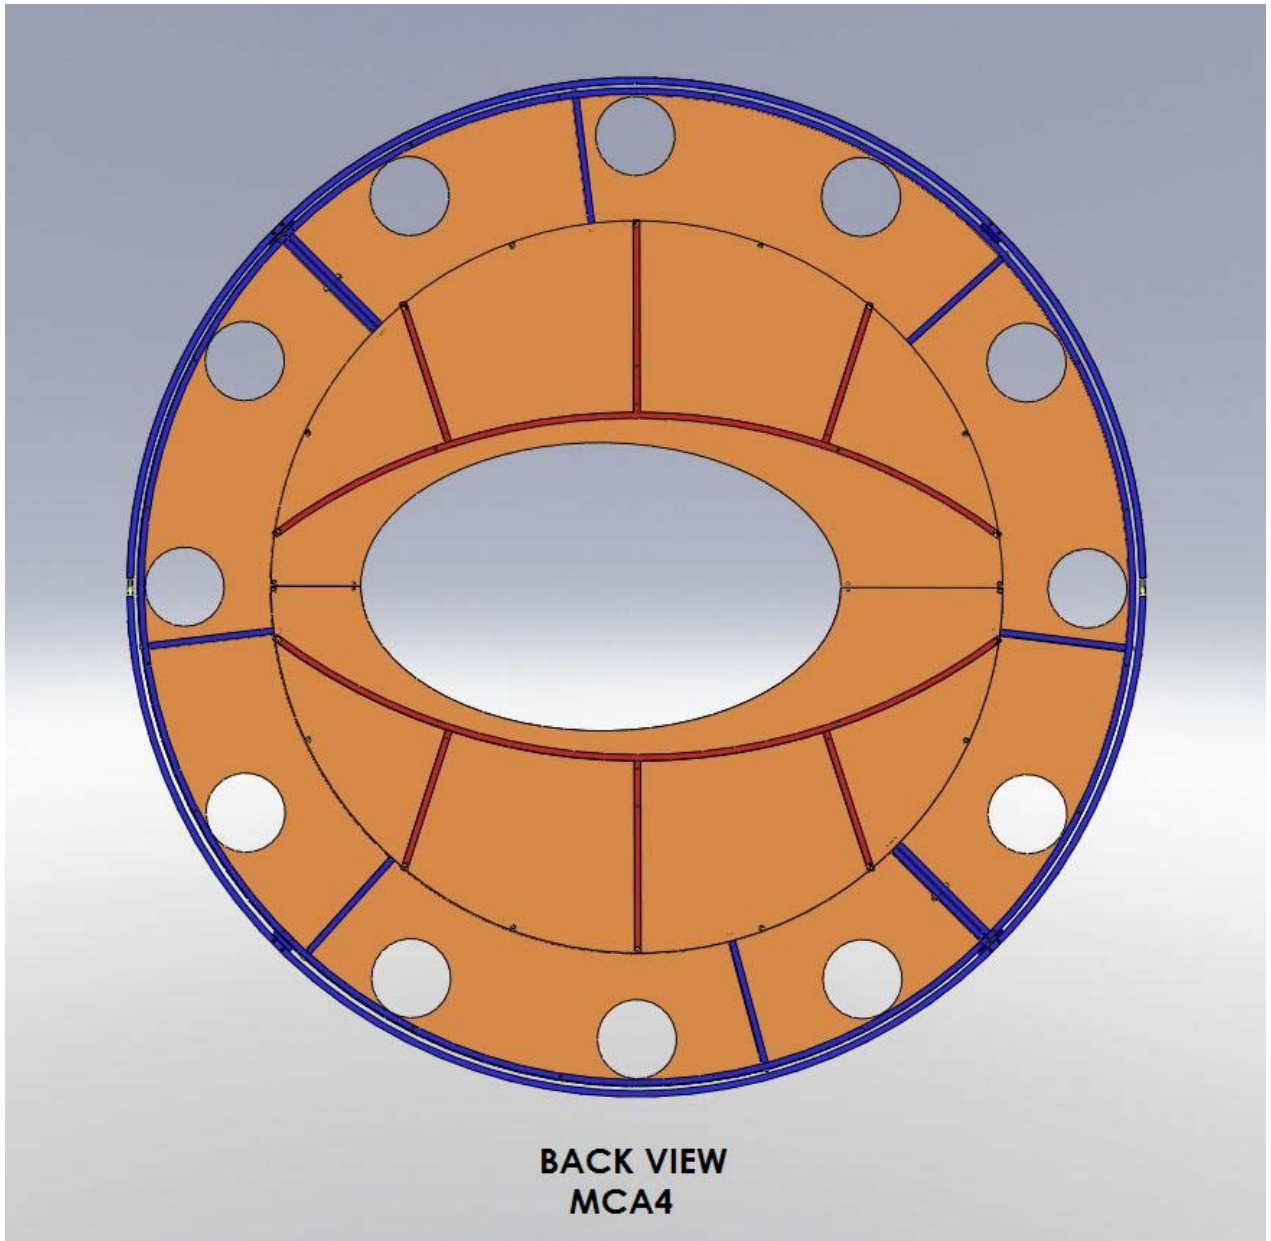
Back View of MCA4 Mode Cleaner Tube Baffle
